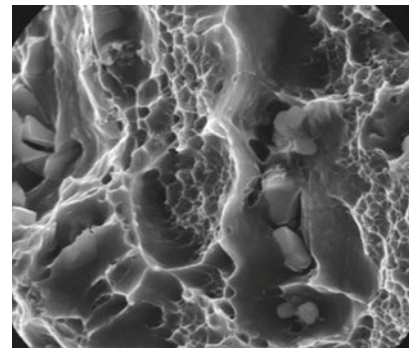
Dimple fracture, Al-Cu-alloy, REM image
